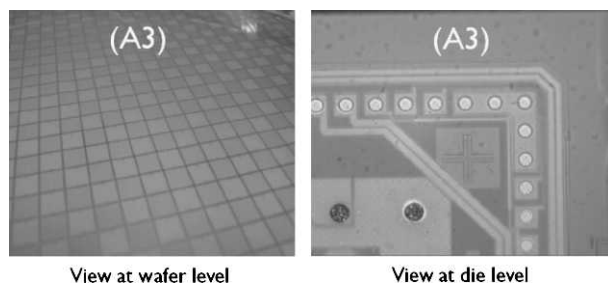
Aspect of material A3 after spin coating on top-die bumped wafer and dicing (die level).
